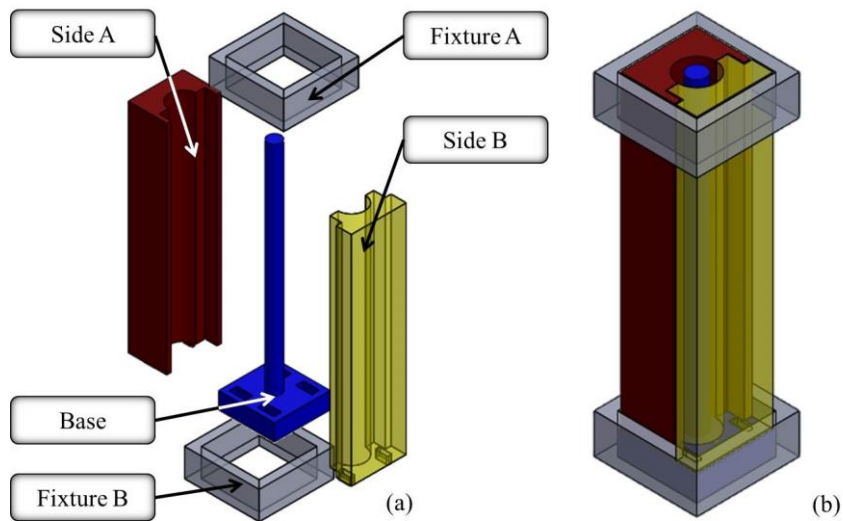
3D Model for Mold of Making Ring-Shaped Wall, (a) Exploded View; (b) Assembly View
